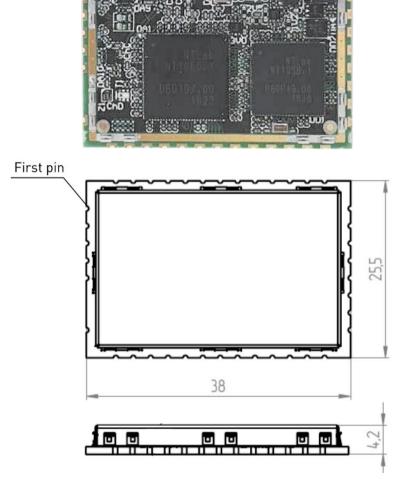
NTL103.SMT OEM module top view and dimensions, mm
